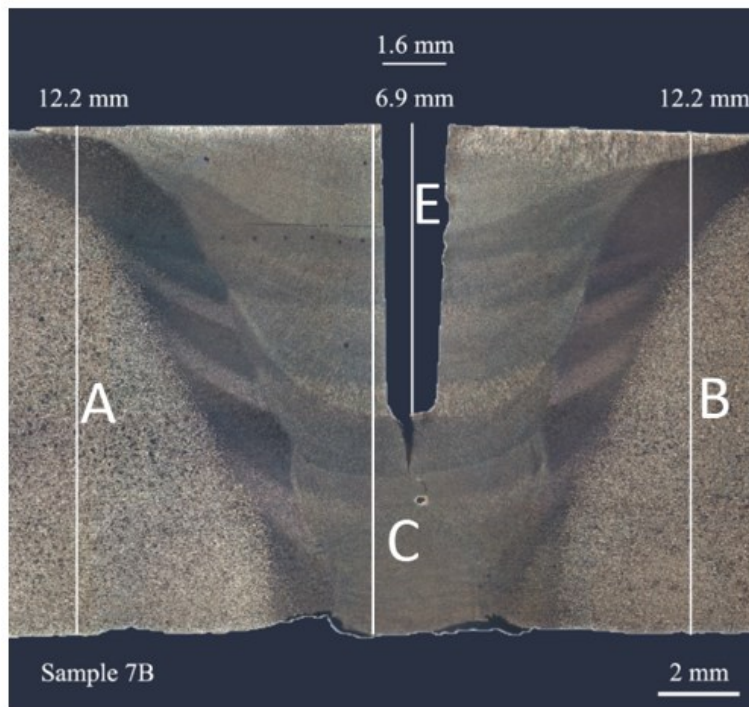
Sample 7B with the numbering used to study the true dimensions of the machined flaw
